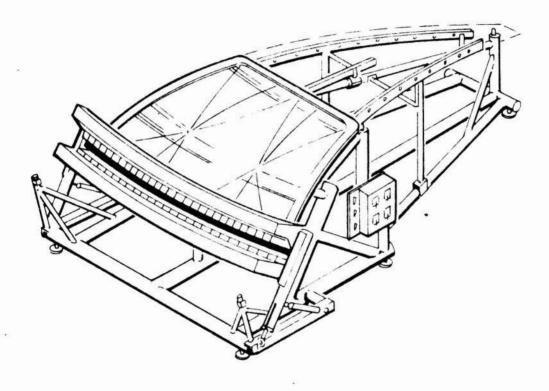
Thick-to-Thin Weld Fixture
